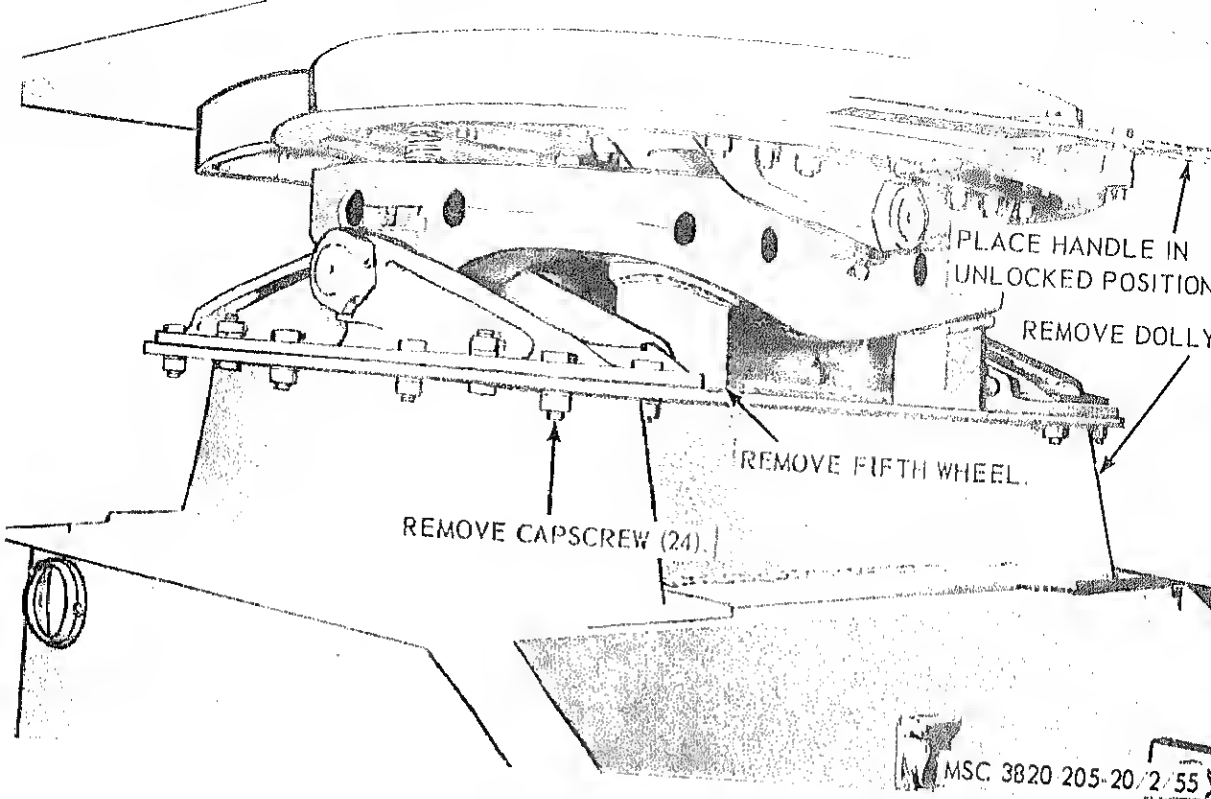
Fifth wheel and dolly assembly, removal and installation.
